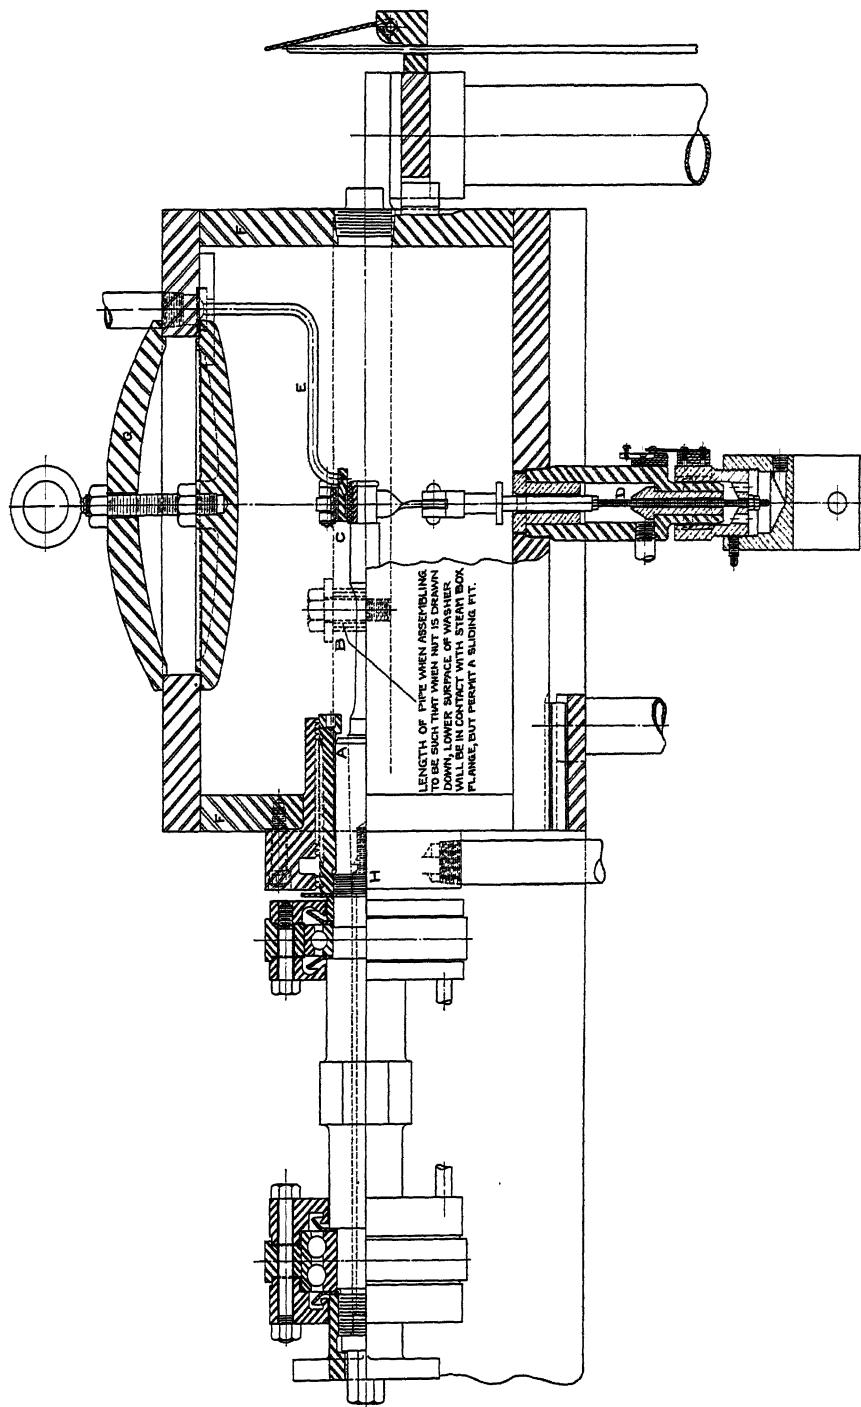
ASSEMBLY DRAWING OF STEAM-FATIGUE TESTING MACHINE.
